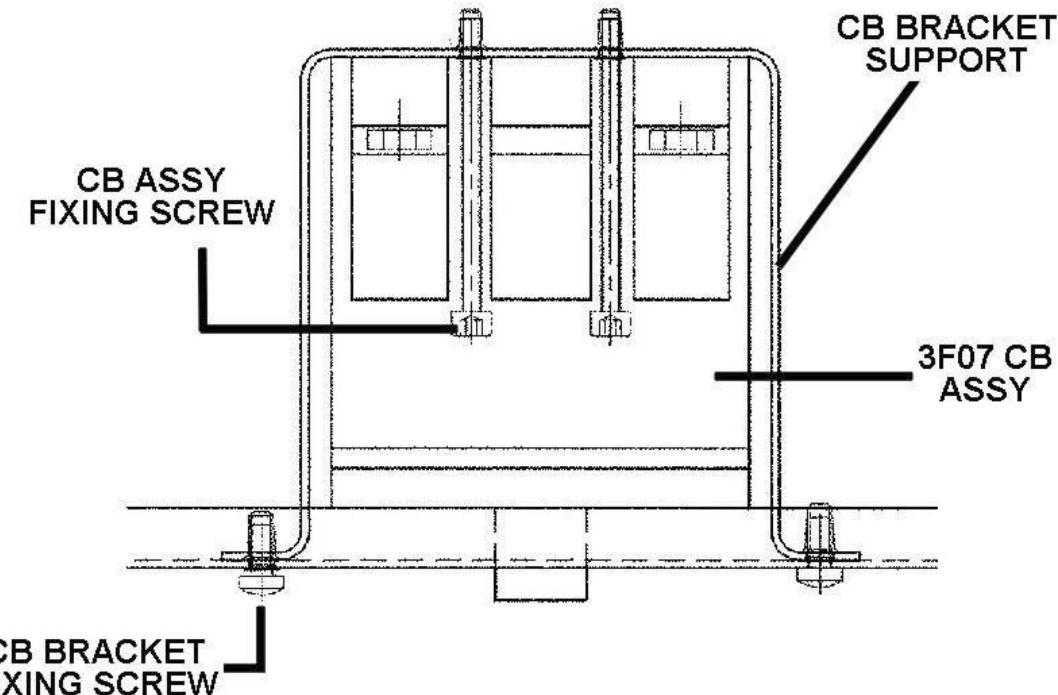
3F07 BIPOLAR CIRCUIT BREAKER ASSY - MOUNTING
